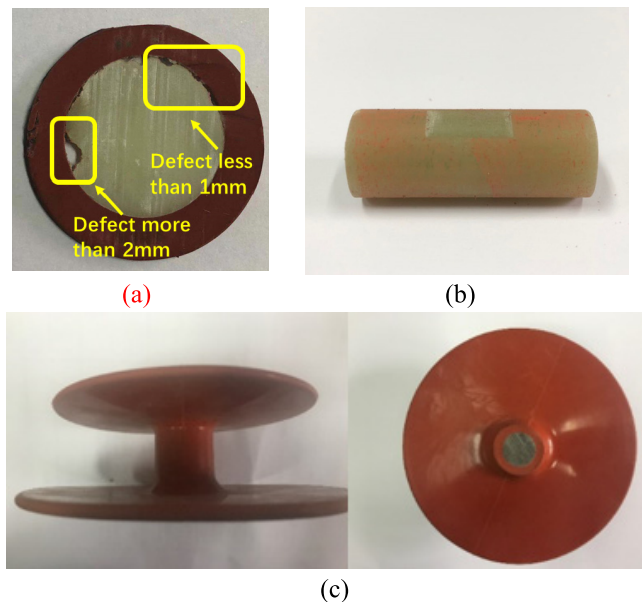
Short insulator samples: (a) Typical air gap in insulators; (b) 1mm air gap defect; (c) Defective short sample.
